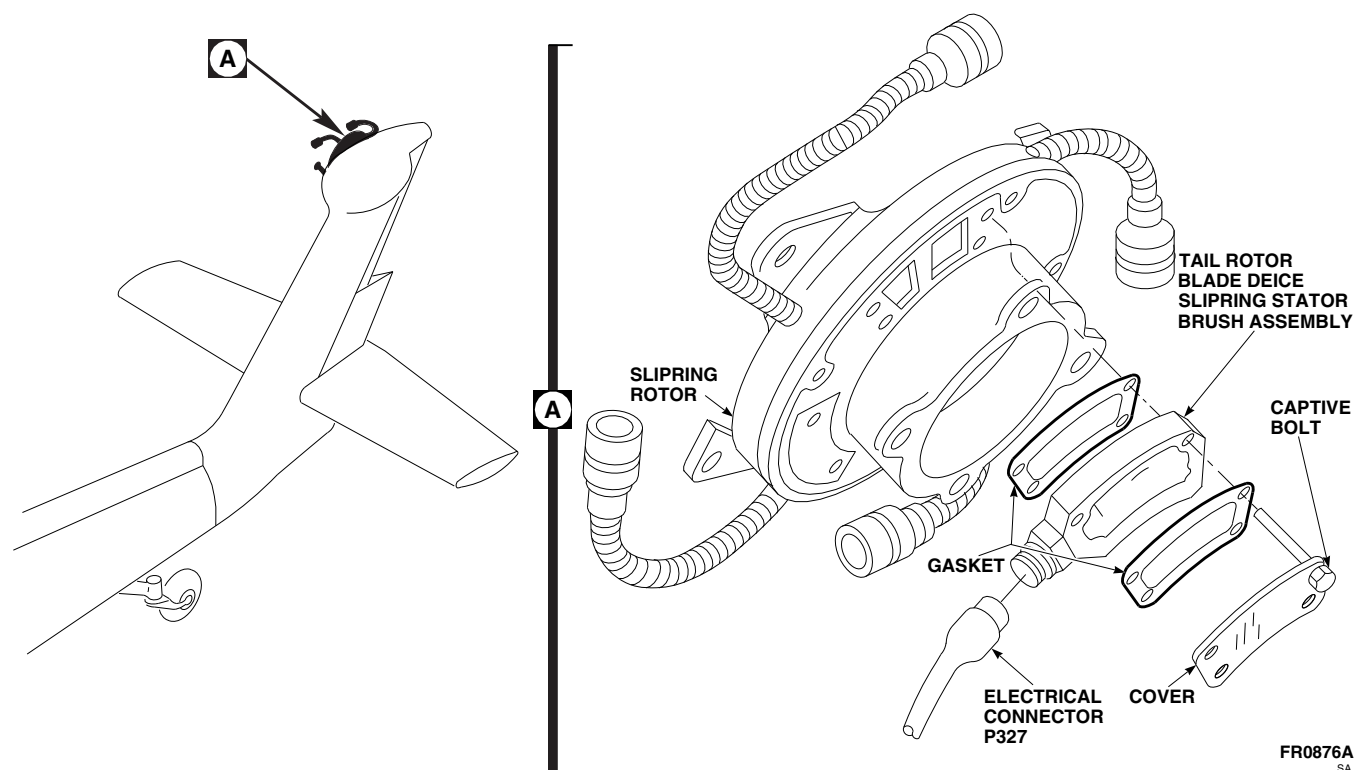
REPLACE TAIL ROTOR BLADE DEICE SLIPRING STATOR BRUSH ASSEMBLY
